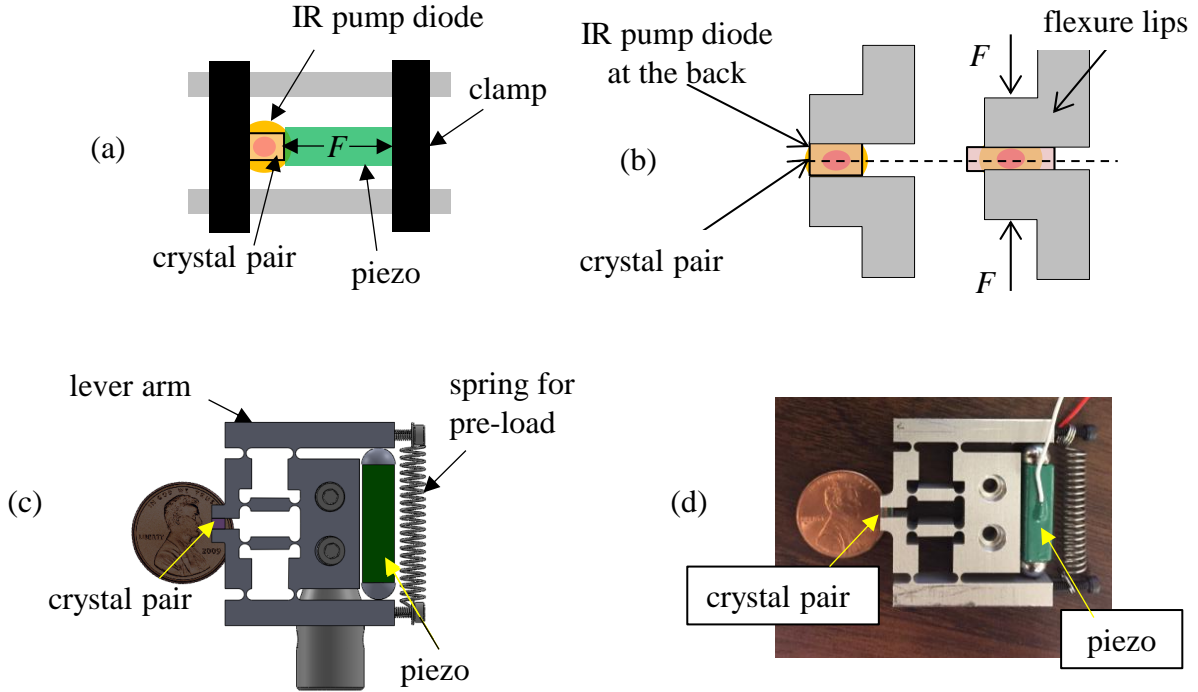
Schematic of the flexure - based crystal compressor; (a) first prototype using a clamp (b) second prototype using a flexure gripper (c) solid model of the mechanisms (d) fabricated mechanism.
